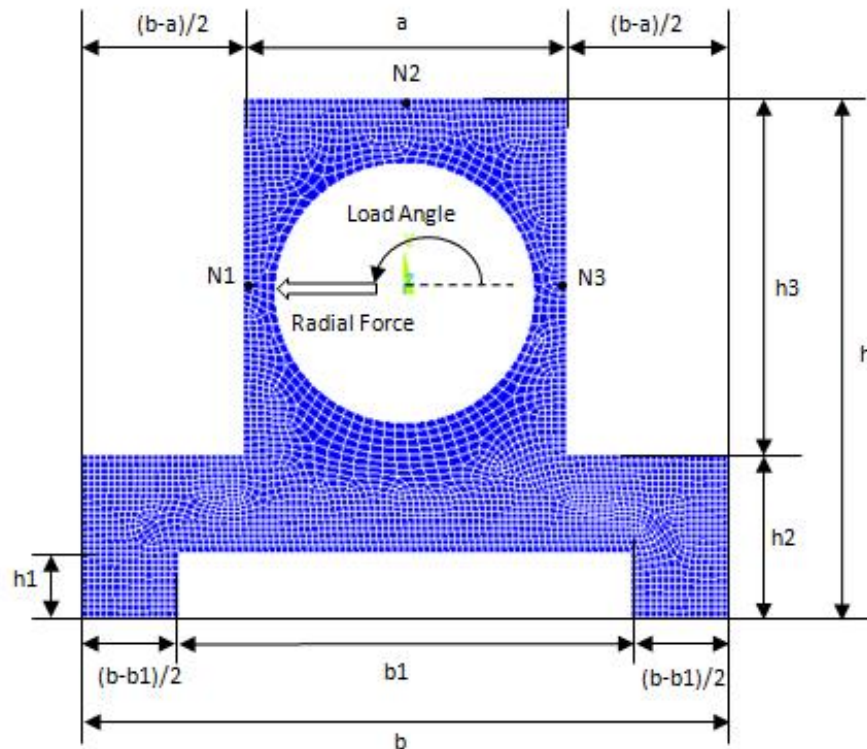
Bearing housing dimensions and sensor locations in the finite element model
